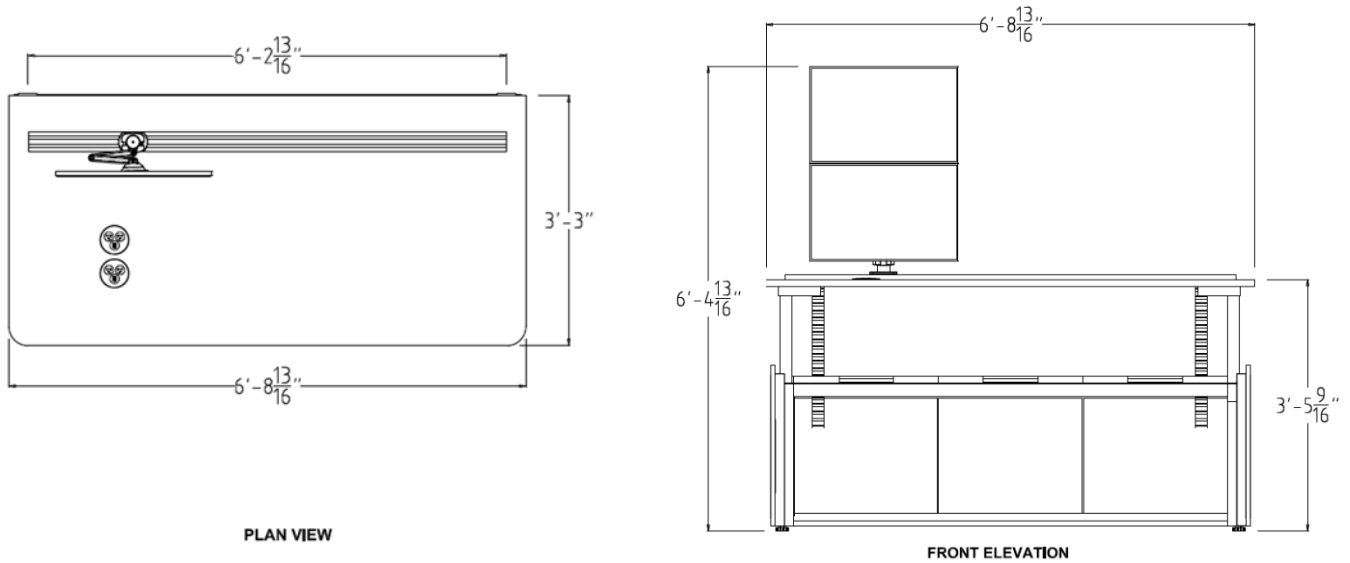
Hobbs PD Office Sightline Sit Stand Desk Plan View and Front Elevation
